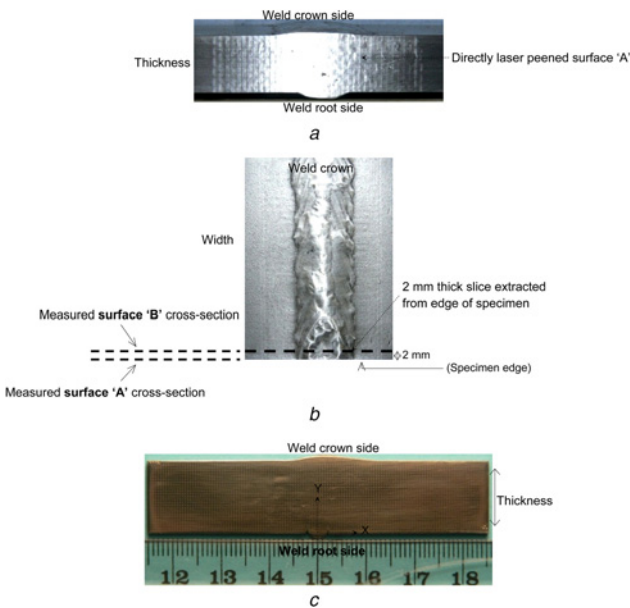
Sample for Vickers hardness measurements from the LSP-3 peen layer butt welded specimen
